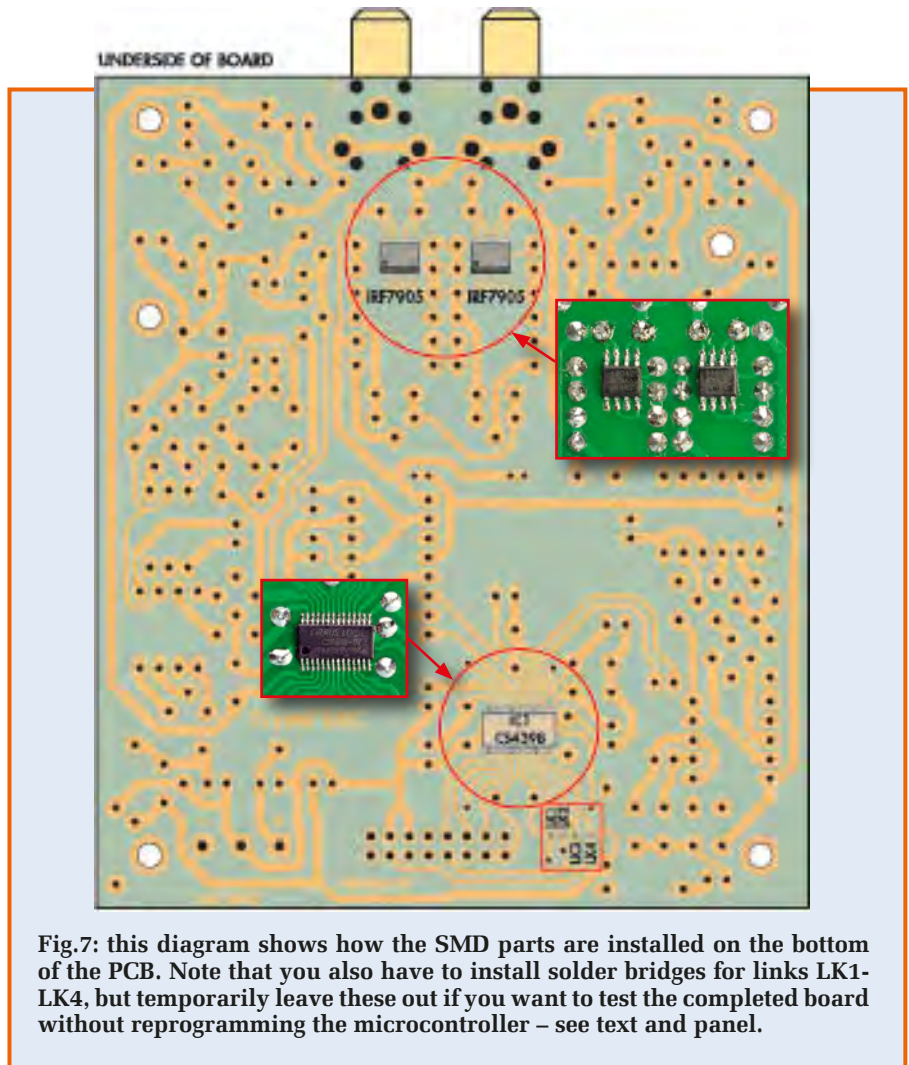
this diagram shows how the SMD parts are installed on the bottom of the PCB. Note that you also have to install solder bridges for links LK1-LK4, but temporarily leave these out if you want to test the completed board without reprogramming the microcontroller – see text and panel.
